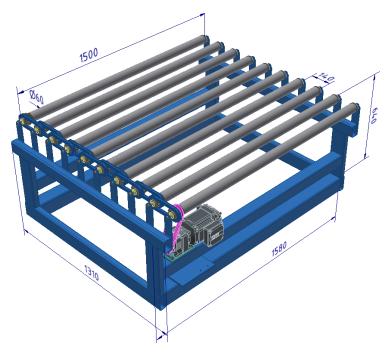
Roller conveyor after sanding machine with dimensions in mm.
